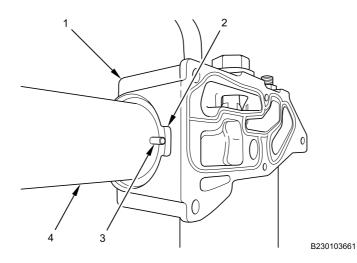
Oil Cooler Locator Pin (Oil Filter Header Shown, Front Oil Cooler Header Similar).
